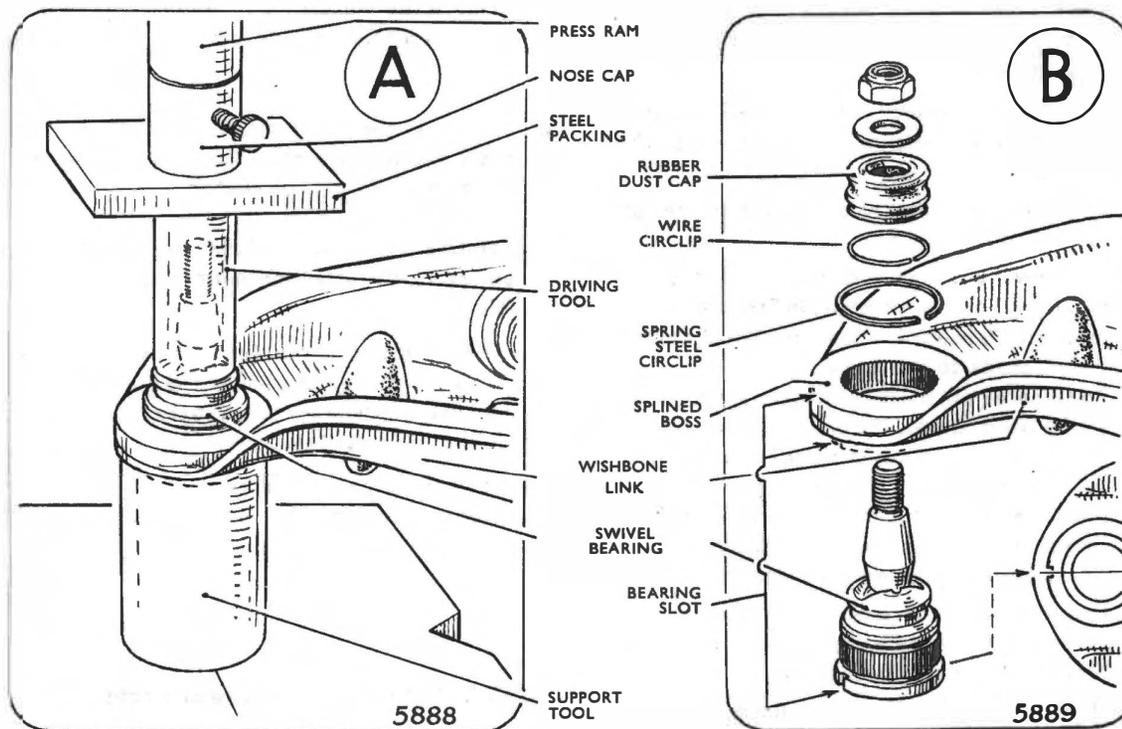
"A" pressing out swivel bearing from top link and "B" showing correct position of alignment slot when refitting swivel bearing
